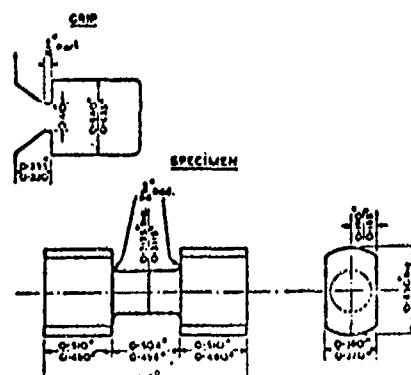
Impact Tensile Specimen and Detail of Grip.
